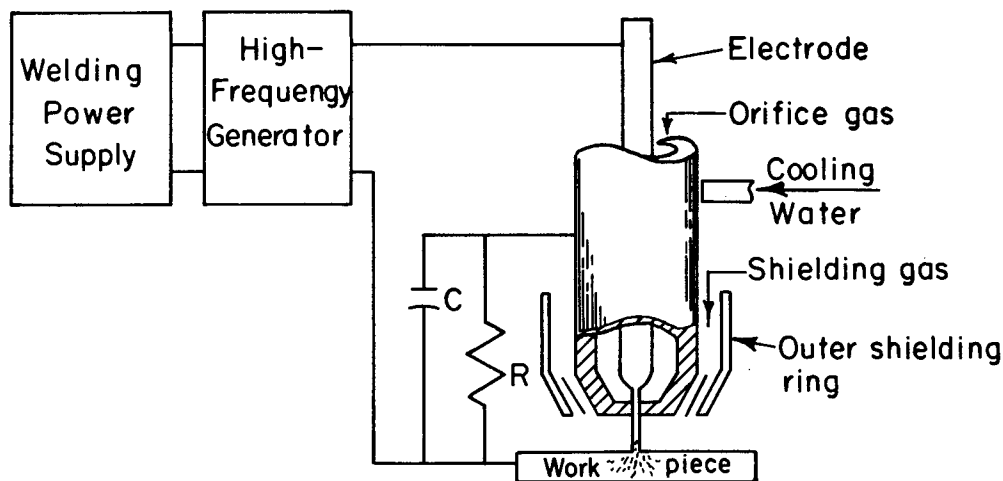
ELECTRIC CIRCUIT FOR PLASMA-ARC WELDING
